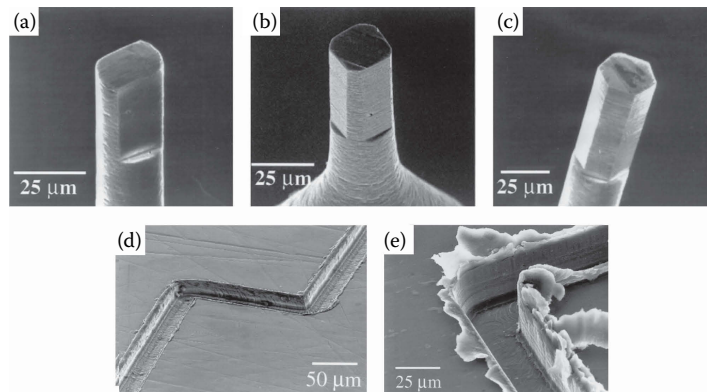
Micro end mill tools fabricated by focused ion beam sputtering with (a) two, (b) four, and (c) five cutting edges, respectively; (d) micro slots in brass machined by the micro end mill tool having five cutting edges; (e) micro-slot in Al 6061 machined using the single two-facet micro end mill tool
